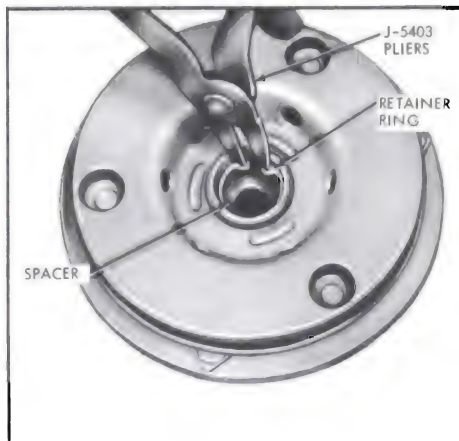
Removing Clutch Drive Plate Retainer Ring
